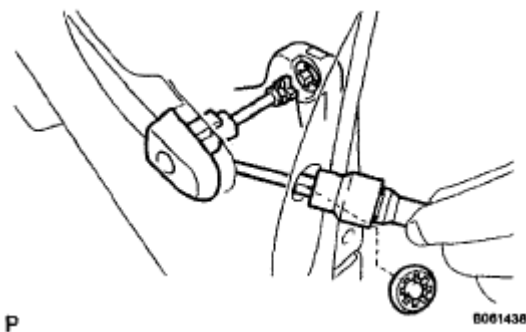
Loosening Front Door Outside Handle Cover Screw
